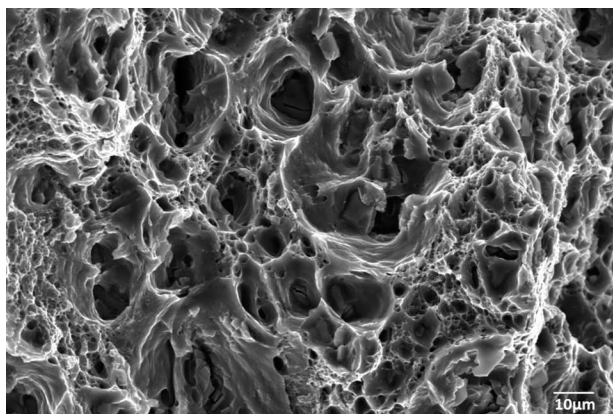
Another view of high magnification image of the fracture surface shown in Fig. 169
